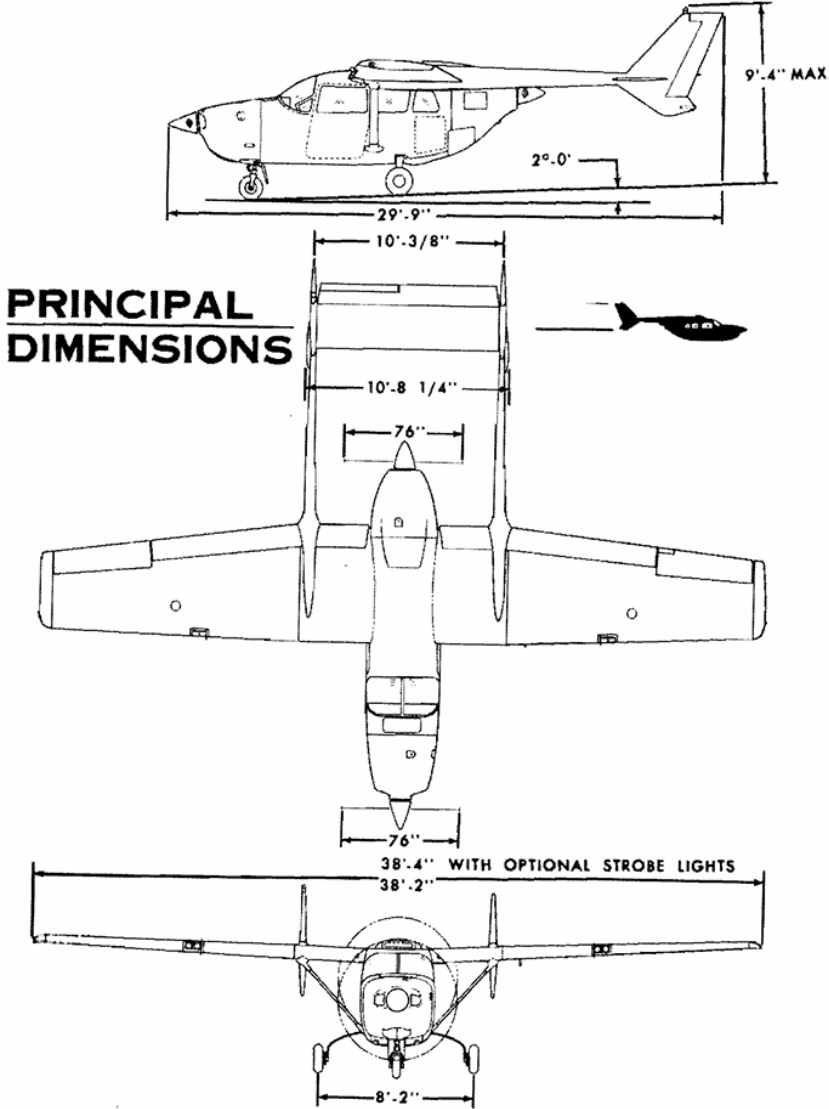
Cessna 337F Super Skymaster principal dimensions [12]
